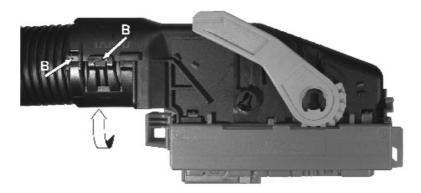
Closed and locked tube holder Abb. 50: geschlossene und verrastete Rillrohraufnahme
